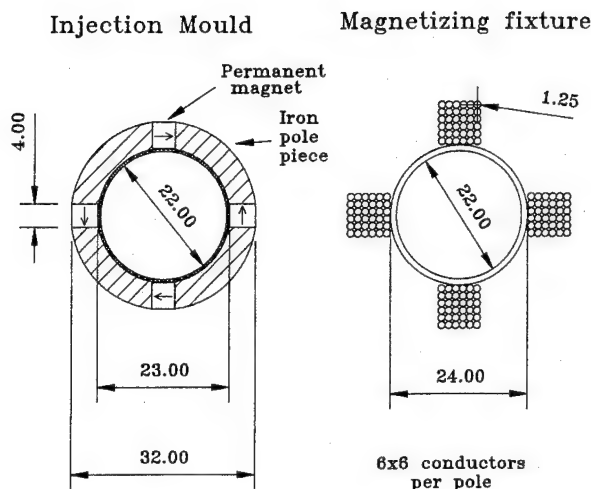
Leading dimensions of mould and impulse magnetizing fixture.
